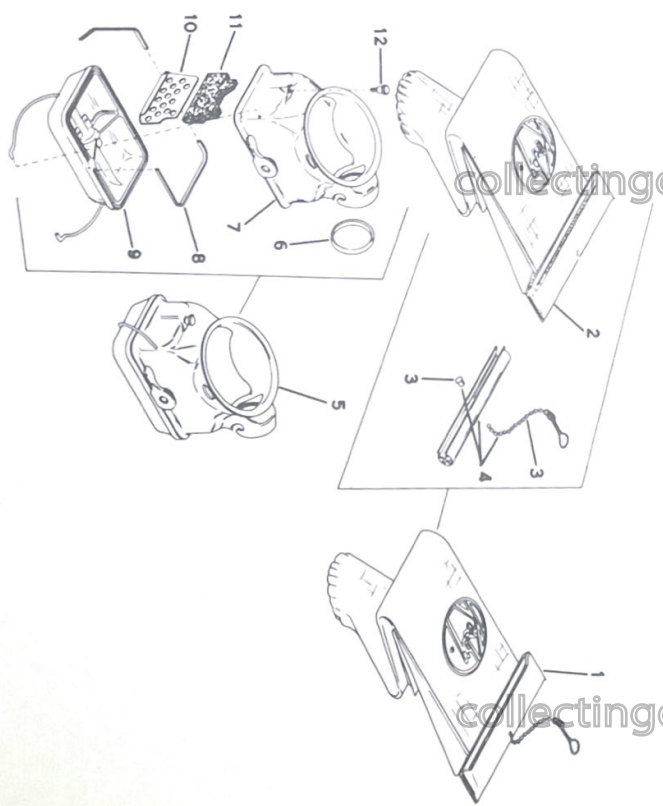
Emtor Group, exploded view (Models 505/561)
